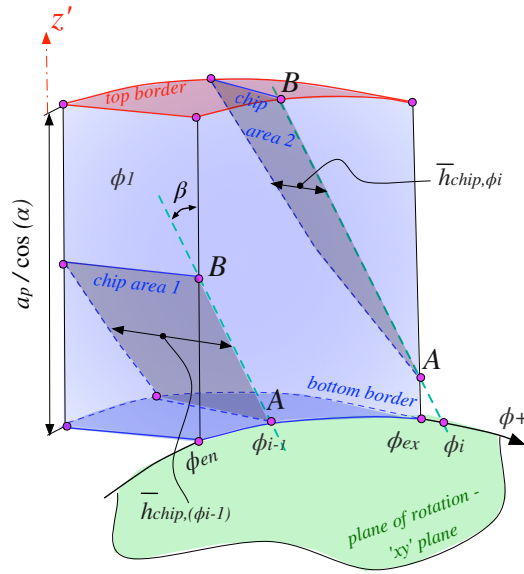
Schematic representation of a single engagement area that occur during the non-tilted cut: ϕ - tool angular position; ϕ_i - tool instantaneous position; ϕ_+ - tool rotation direction; ϕ_{en} - edge enter angle; ϕ_{ex} - edge exit angle; AB - engagement length of the acting edge at ϕ_i position; \bar{h}_{chip,ϕ_i} - instantaneous average chip thickness
